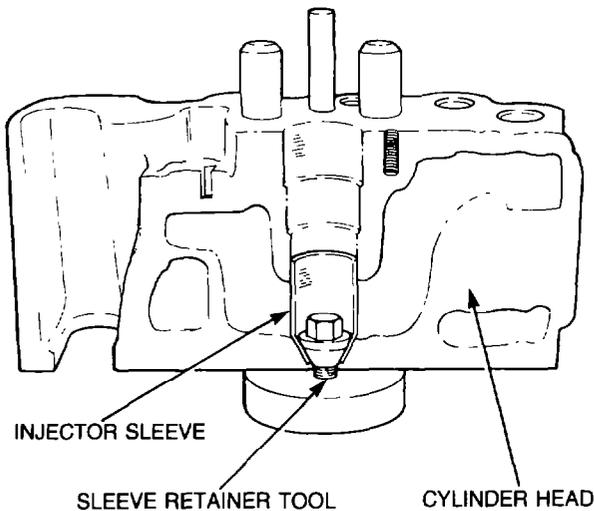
Fuel Injector Sleeve Retainer — Installation
